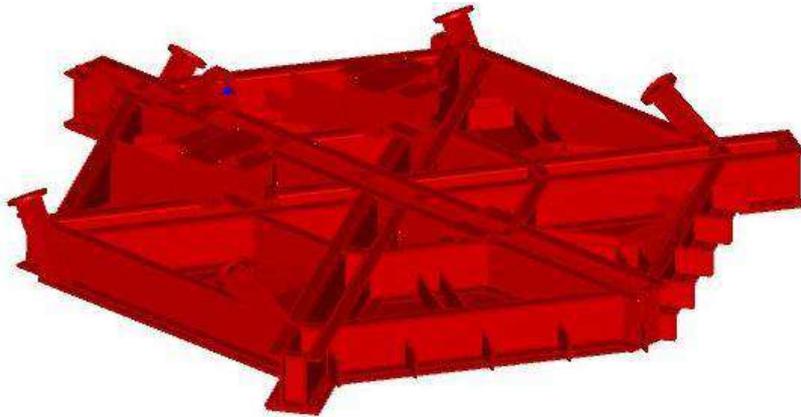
M1 Dish halves assembled and screw jacks with flat head
